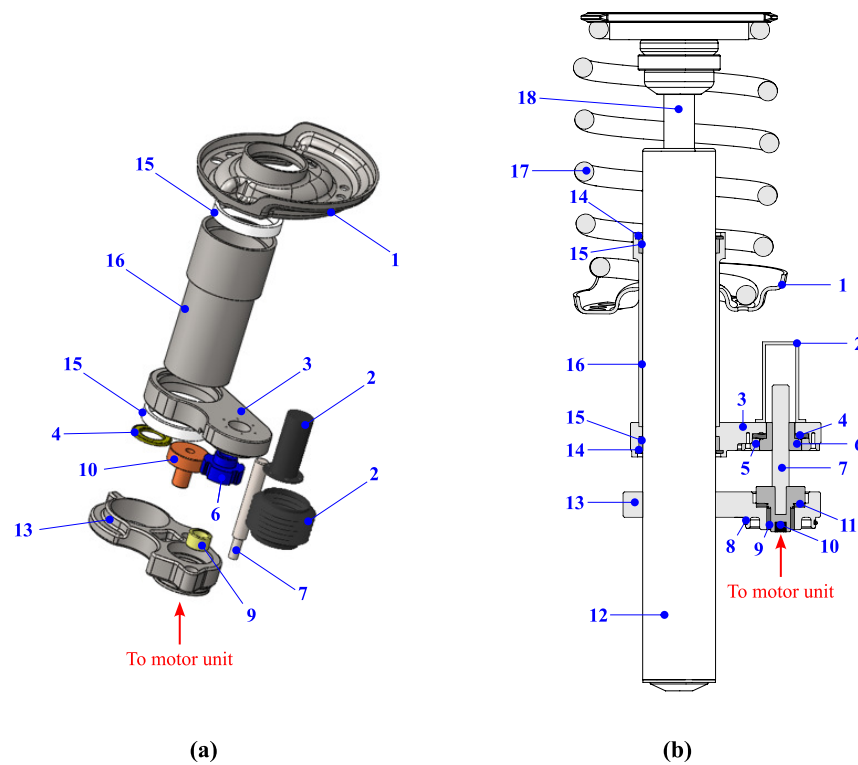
Prototype of the front suspension actuator with eccentric screw shown in (a) 3D view of the components and (b) cross-section of the suspension. Components: (1) spring holder, (2) dust boot, (3) upper arm, (4) conical washer, (5) anti-rotation, (6) nut, (7) screw, (8) O-ring, (9) bronze bushing, (10) screw adapter, (11) axial needle bearing, (12) shock absorber tube, (13) lower arm, (14) retaining ring, (15) bushing, (16) guiding element, (17) spring, (18) shock absorber rod.
